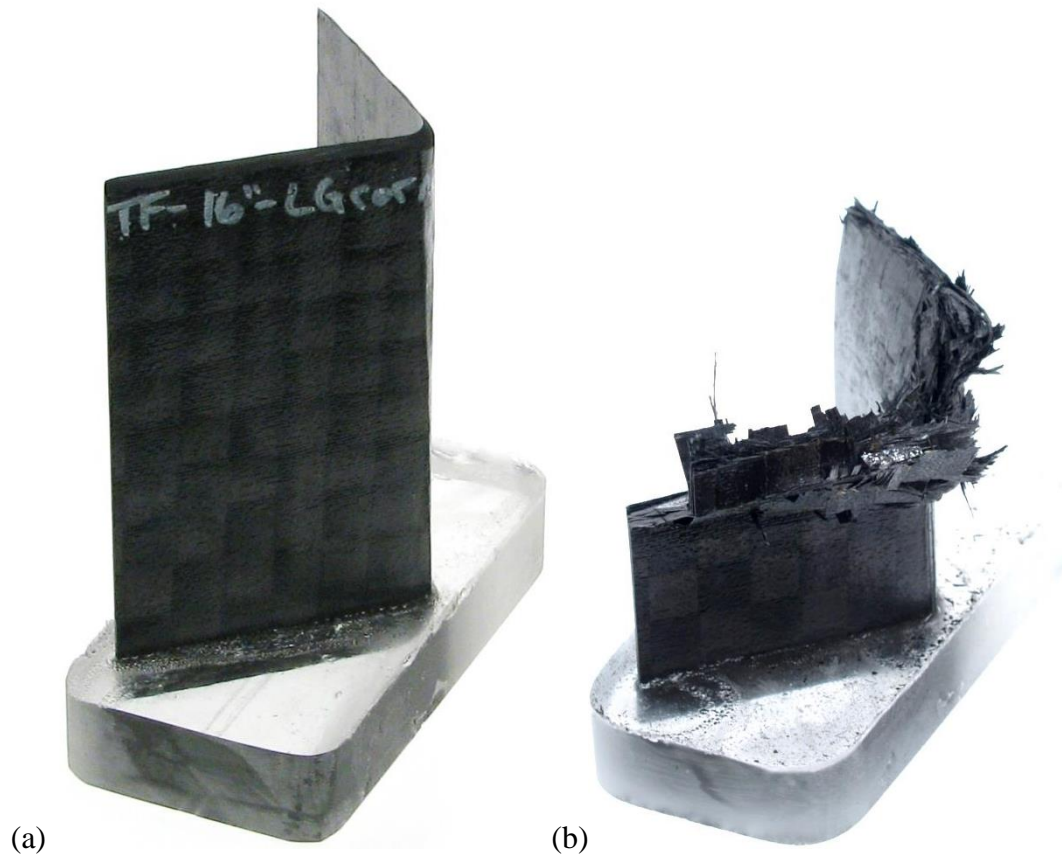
Large corner, specimen V, (a) before and (b) after crush testing.
